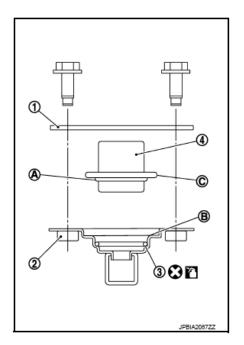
Locating Fuel Damper Related Components Courtesy of NISSAN NORTH AMERICA, INC.
